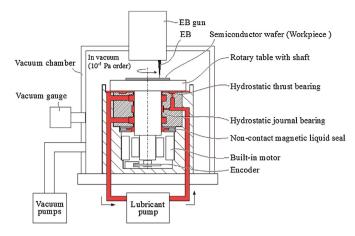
A rotational EB machining system using an ionic-liquid-lubricated hydrostatic spindle.
